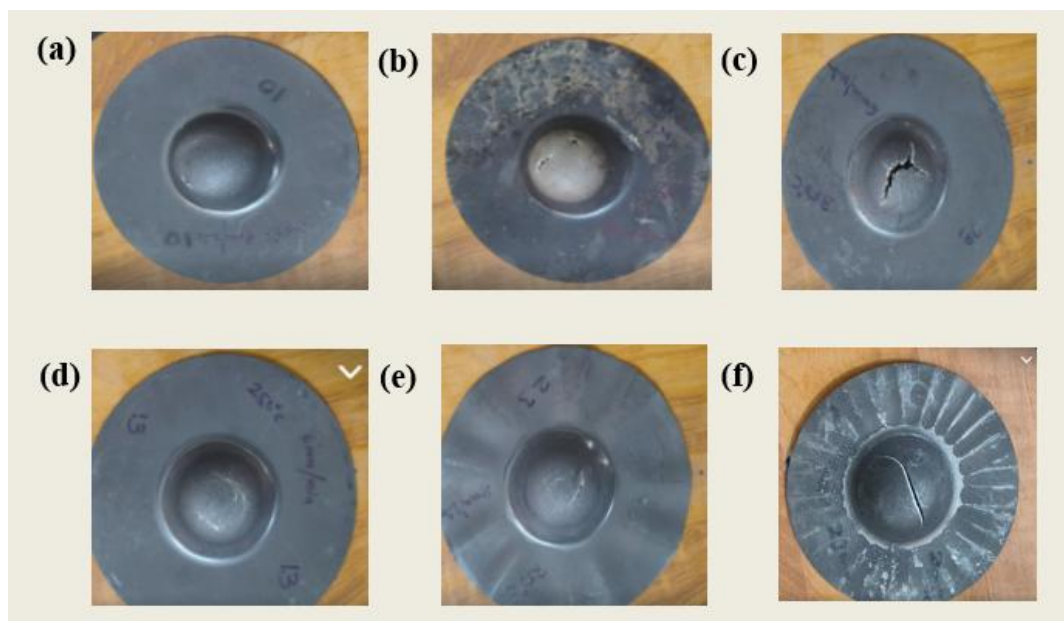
Fractured deep drawn cups drawn at blank holding force of 8 kN, forming speeds were 12 mm/min, 8 mm/min, 6 mm/min at the temperatures (a-c) 350 °C, (d-f) 300 °C.
